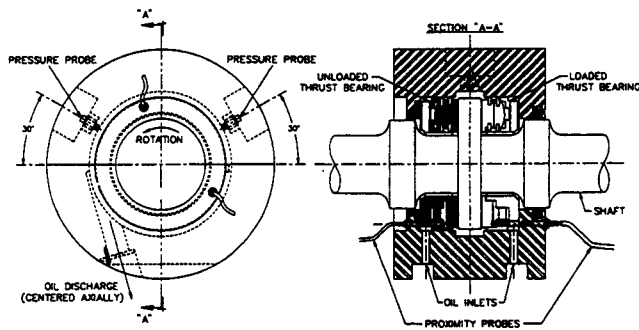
Arrangement of double thrust bearing for pad flutter tests showing proximity and pressure probe locations
